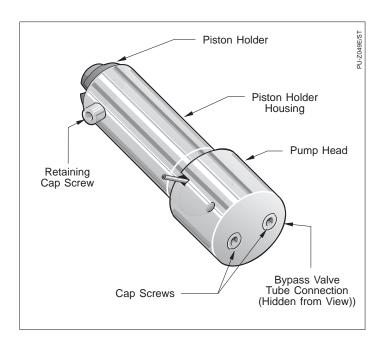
Installing the retaining cap screw (outlet liquid end)
